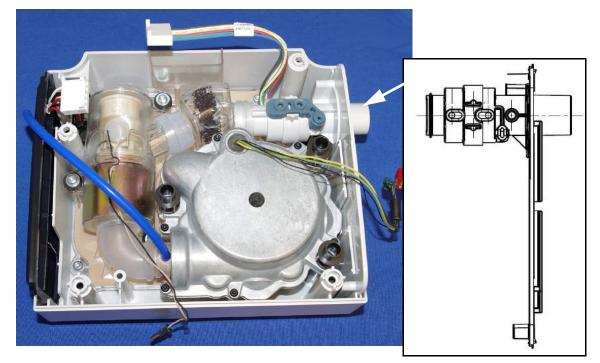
RIGHT PANEL ASSEMBLY
